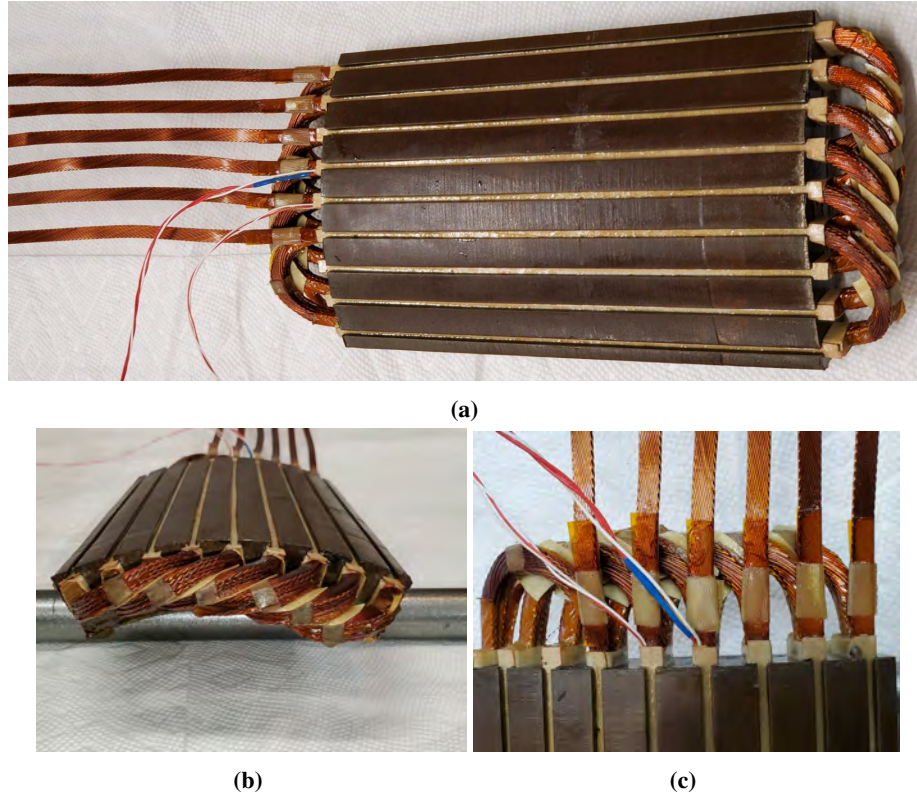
Single-pole-pair stator section to verify winding process (a) Top view (b) Side view (c) Zoomed in
